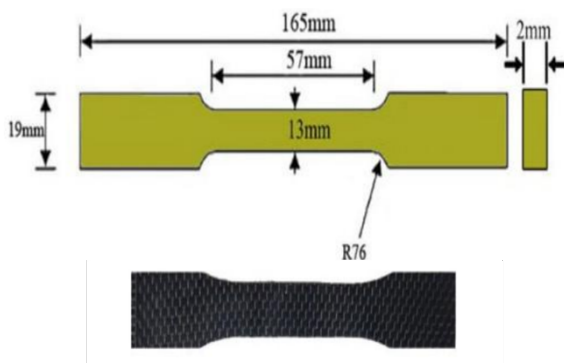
Dimensions of tensile and flexion test specimens for both carbon epoxy and glass fiber
